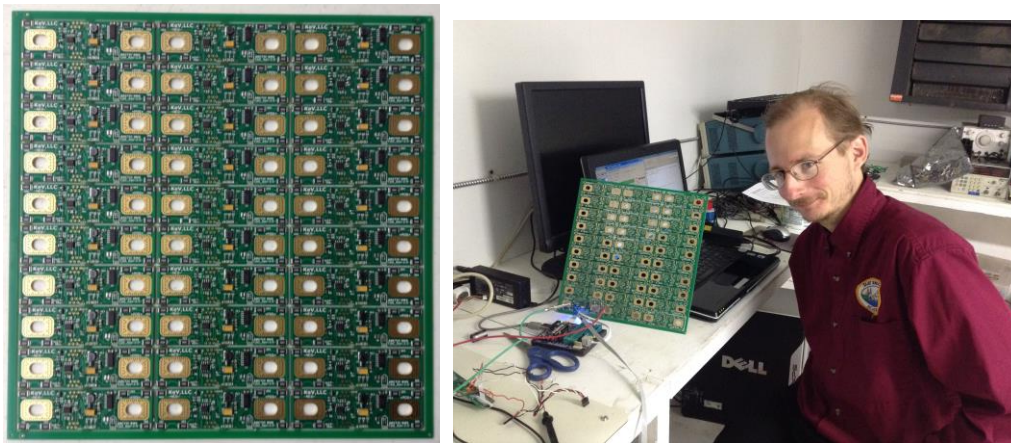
Panelized and assembled TRL-7 BMS boards (Left) Seraphim McGann with working board. (Right)
